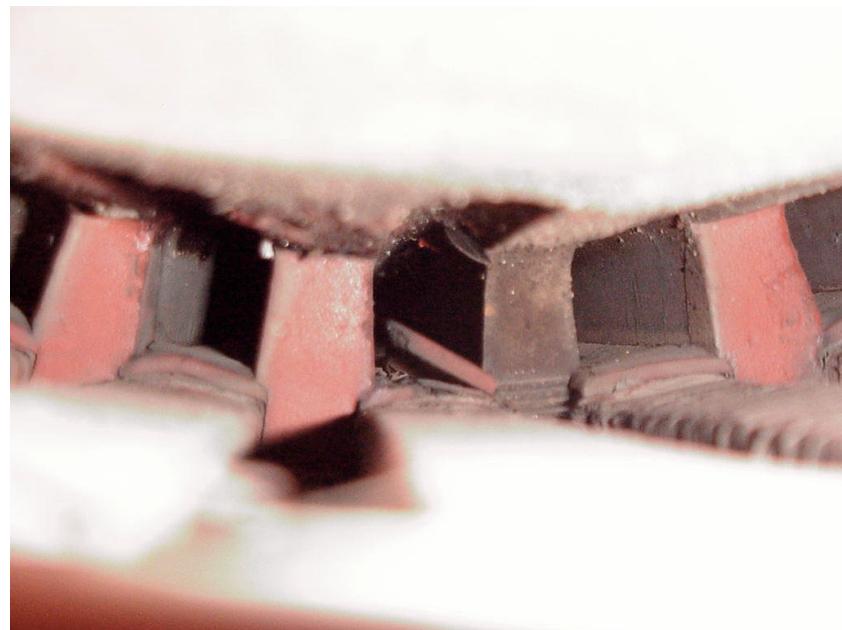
, Fractured Sub-slot Filler, Turbine End
